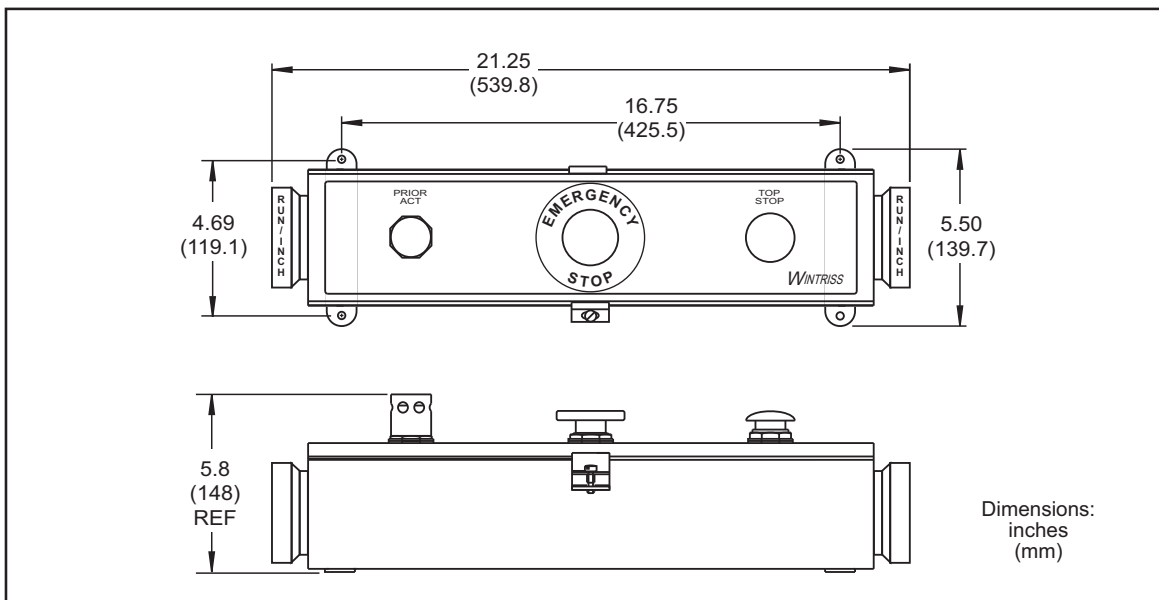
Unwired Operator Station: Mounting Dimensions
